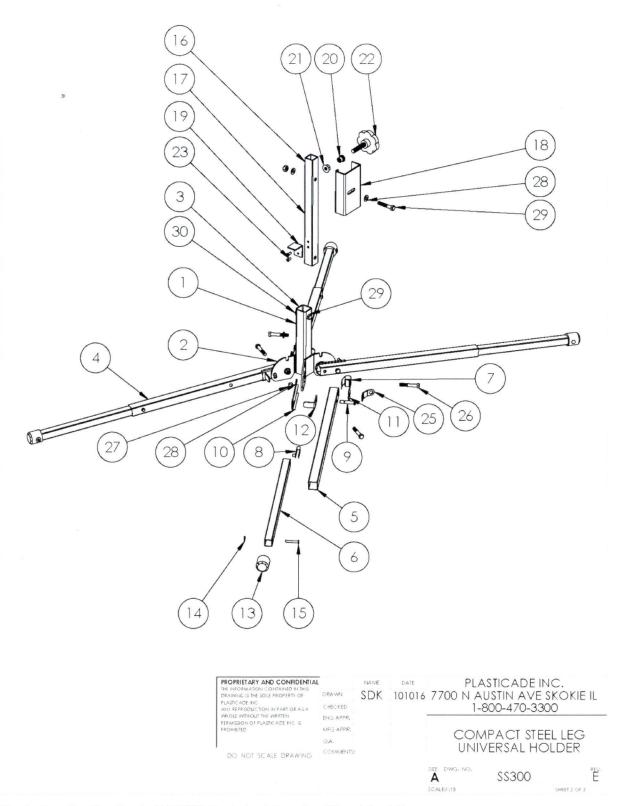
Plasticade® SS300 Technical Drawing (Sheet 2 of 3)
